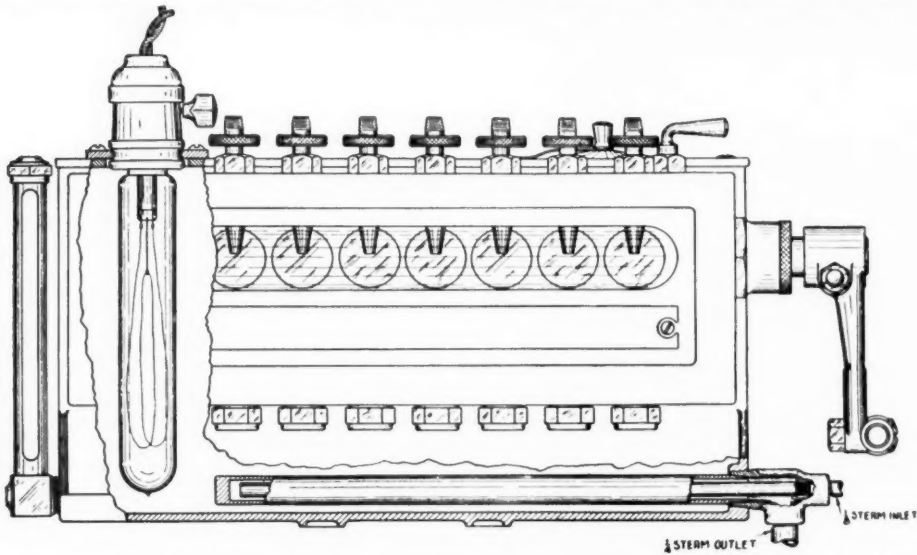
Showing the method of equipping a Bowser model "M" lubricator with either electric or steam heater.
